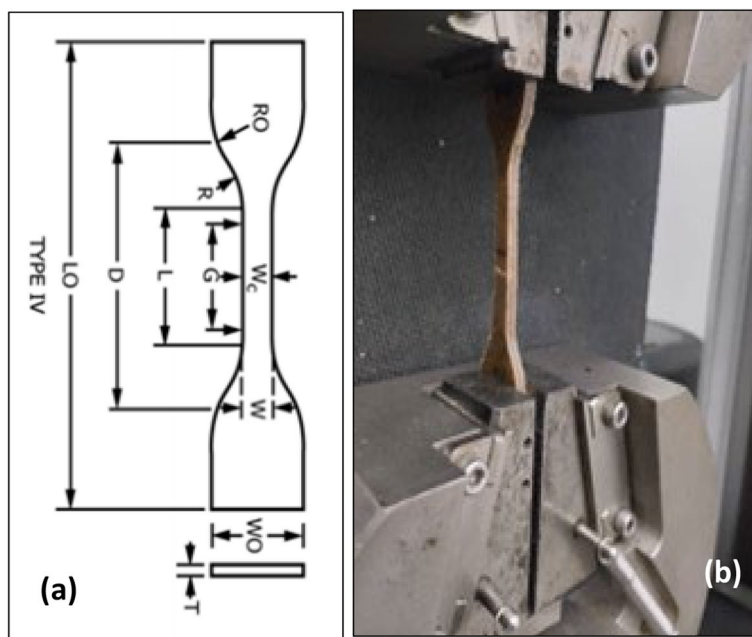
Tensile test specimen: (a) specimen diagram in the ASTM standard, (b) Test specimen on the Instron tensile test equipment
